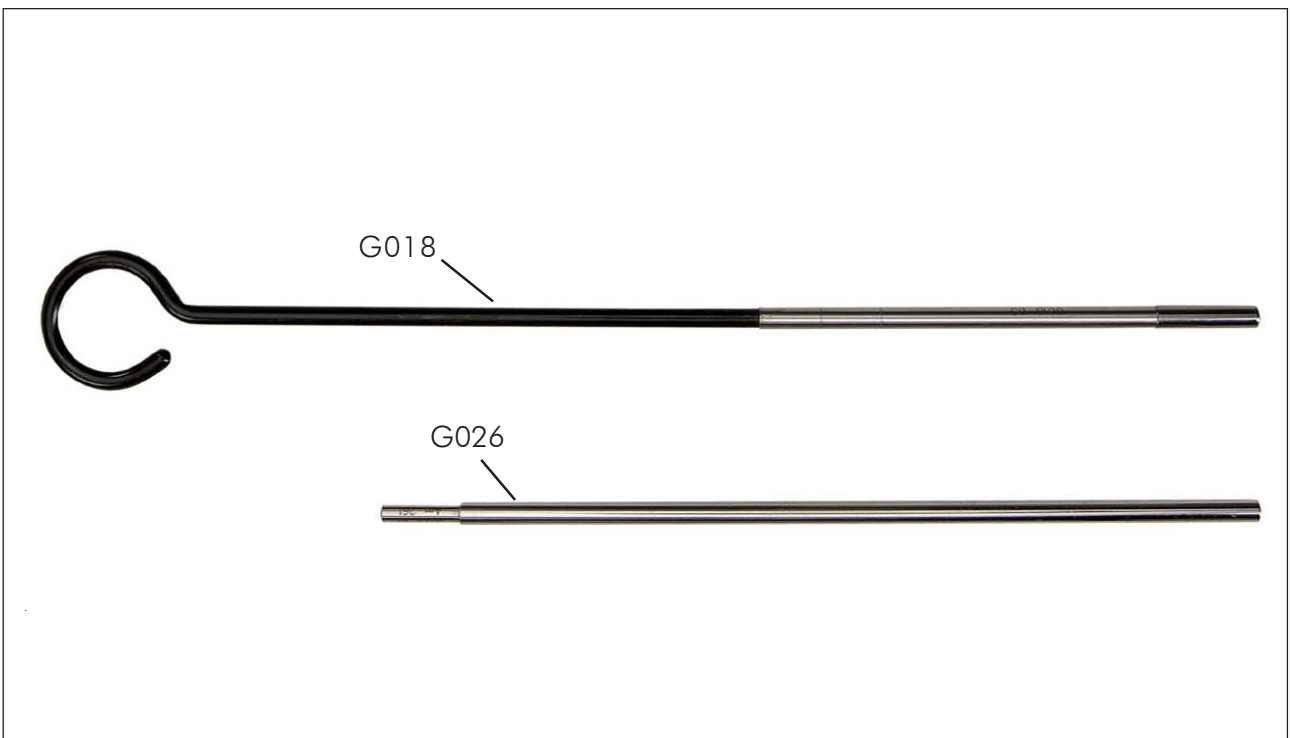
b - Barrel bore gauge G018 and barrel straightness gauge G026
